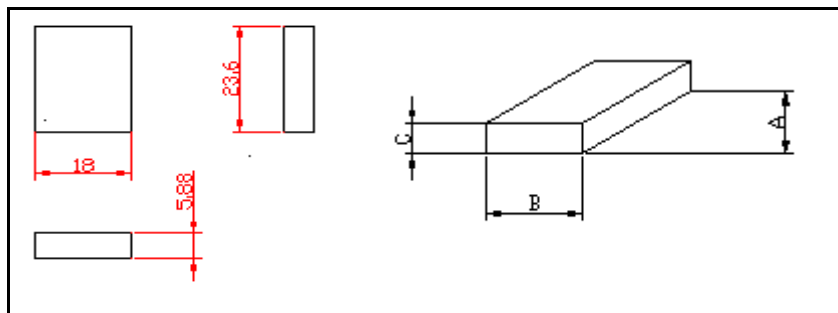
The Dimensions of the Rectangular Prism Component
